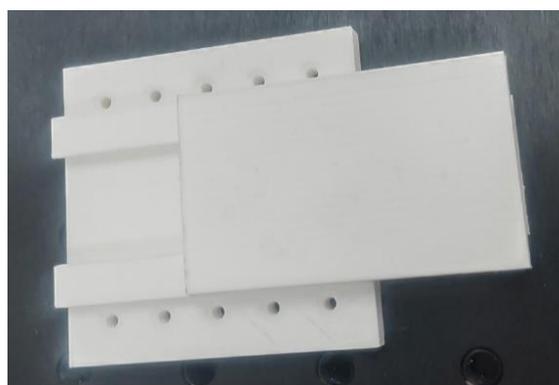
Real view of upper and bottom plate for positioning measuring robots, 3D printed
